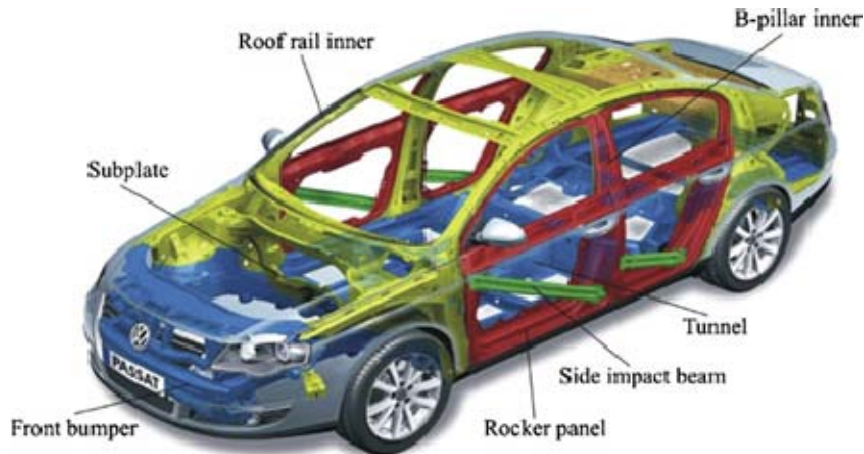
Parts manufactured using hot stamped parts in a modern vehicle^[3]
